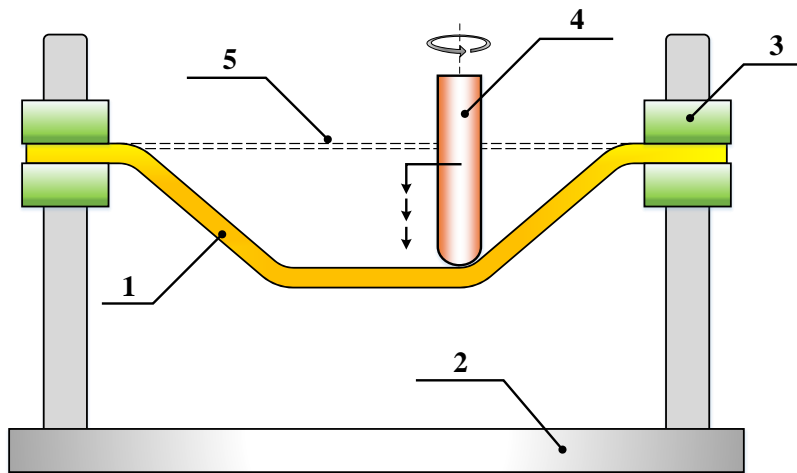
Single-point incremental forming process: 1-blank, 2-base support, 3-grip support, 4-forming tool, 5-blank initial position.
